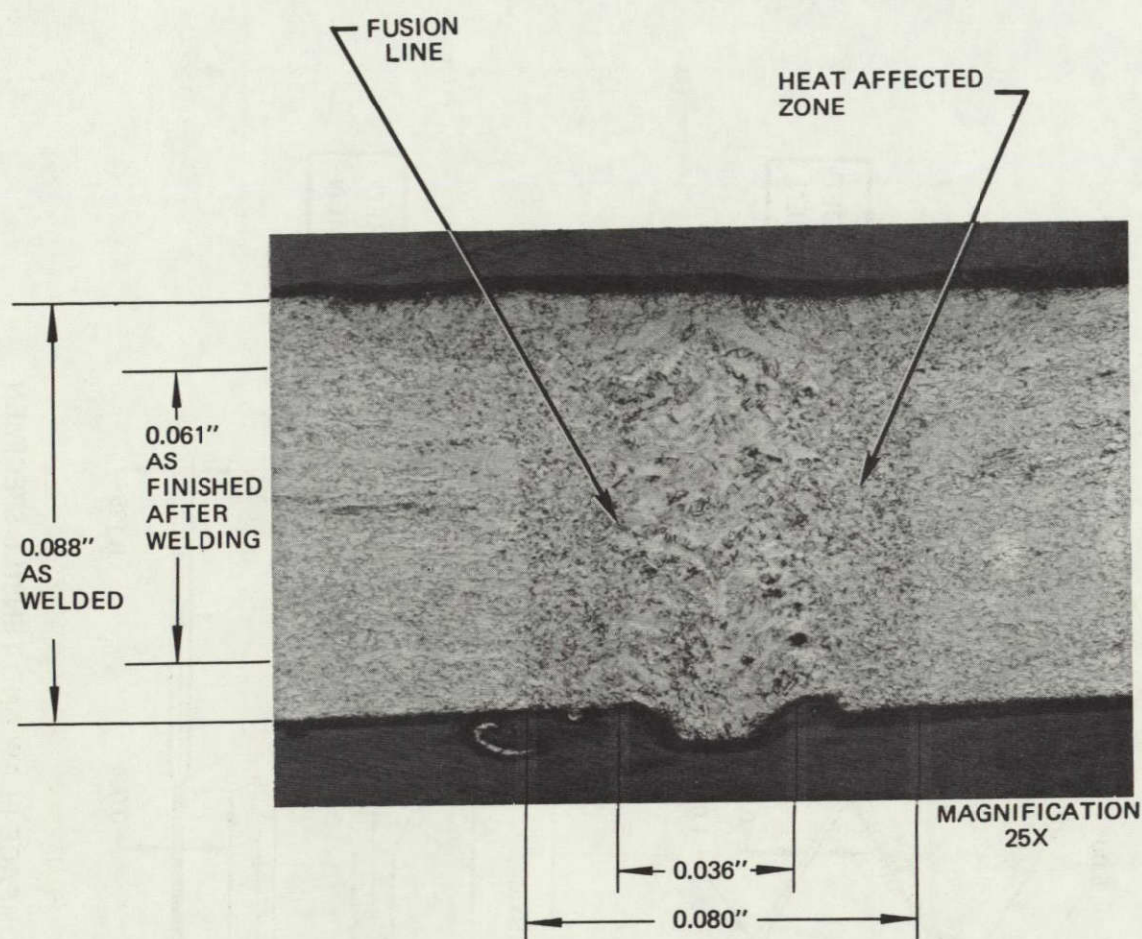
WELD METAL (C) SURFACE FLAW AND TENSILE SPECIMEN
